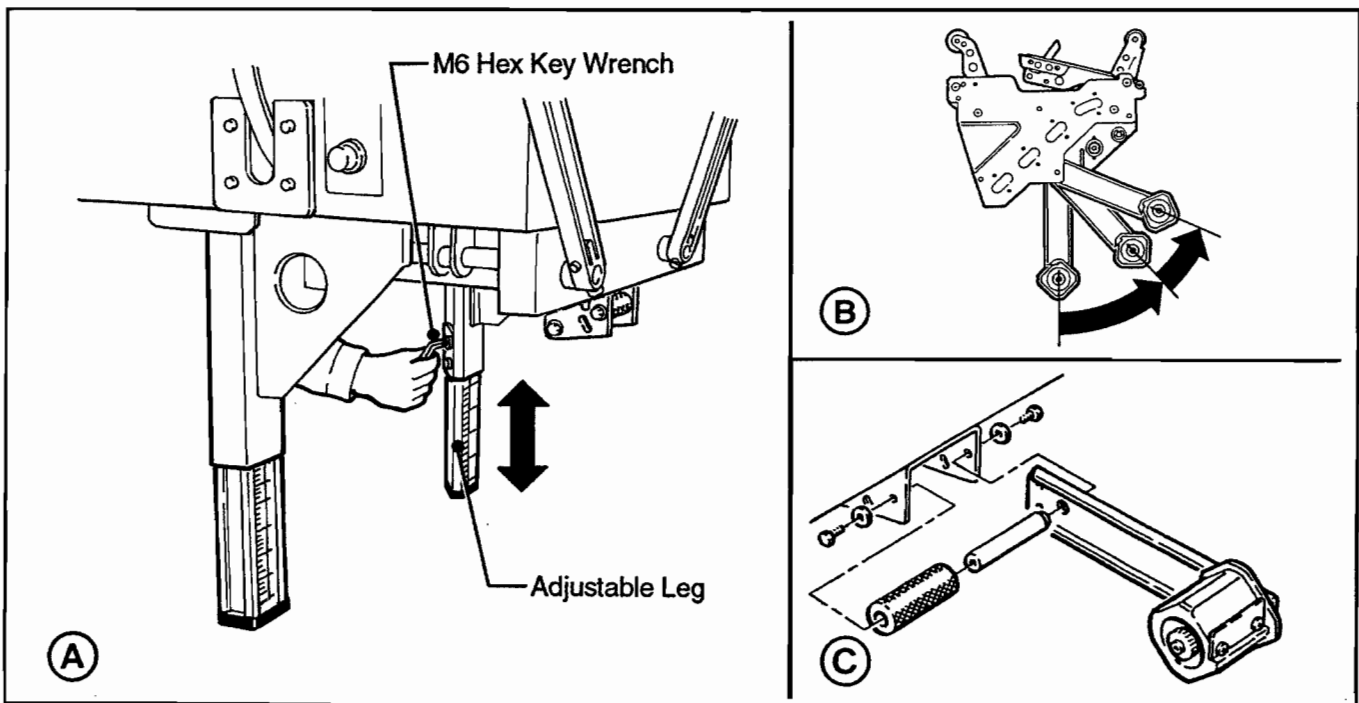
Machine Bed Height Adjustment and Lower Tape Drum Bracket Position
